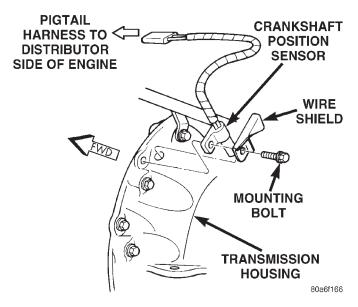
Crankshaft Position Sensor—4.0LEngine
